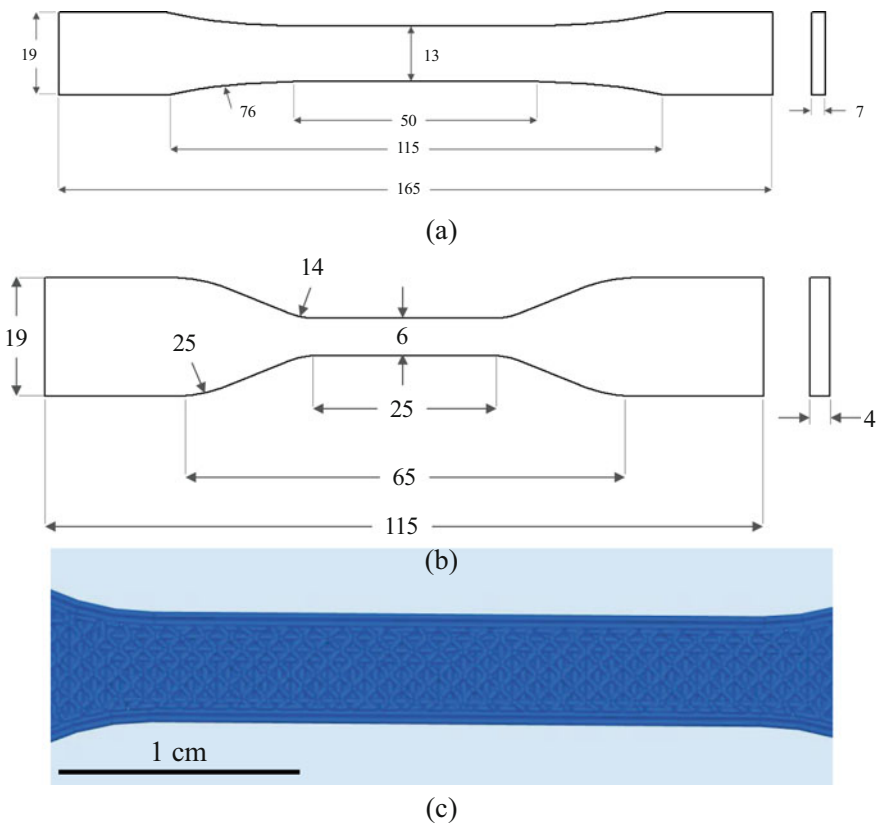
ASTM D638 (a) Type I and (b) Type IV tensile specimen dimensions. (c) Gauge section of tensile bar showing infill pattern used in printing HDPE40 specimens in this work
